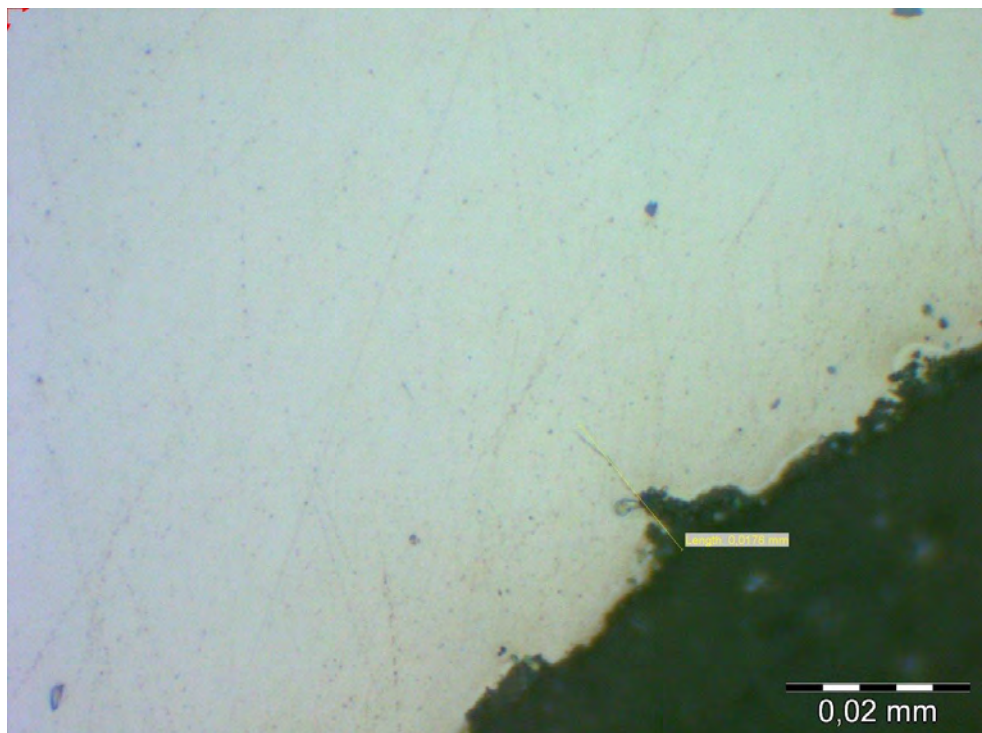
Cut one in crack at segment C, third ridge on barrel no. 14389
